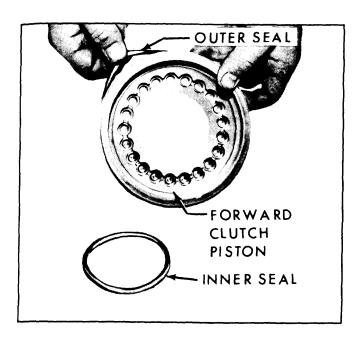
Removing Forward Clutch Piston Inner and Outer Seals
